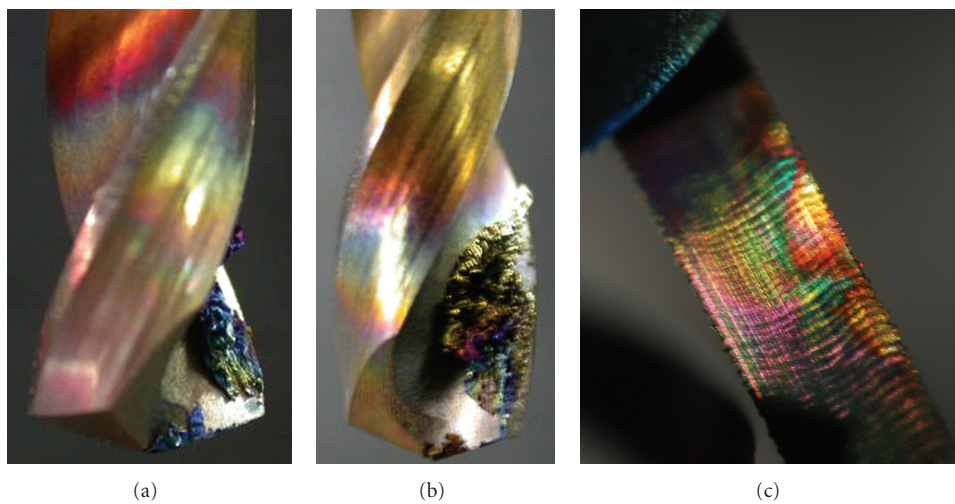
Aspect of the drilling tool after (a) sixteen and (b) seventeen holes at 30 m/min. (c) Chips collected after dry machining of Ti-6Al-4V alloy.
